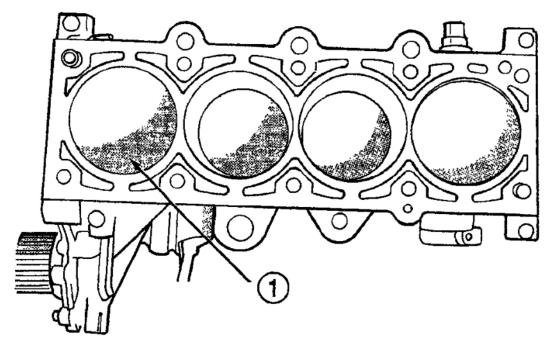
Checking Cylinder Bore Courtesy of DAIMLERCHRYSLER CORP.
